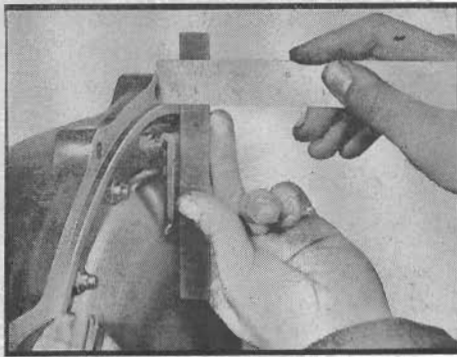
Checking engagement of converter pump hub with front pump drive gear. 1953-59
